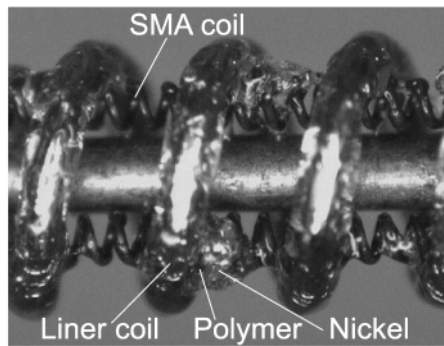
Side view of bending mechanism assembled using electroplating.
